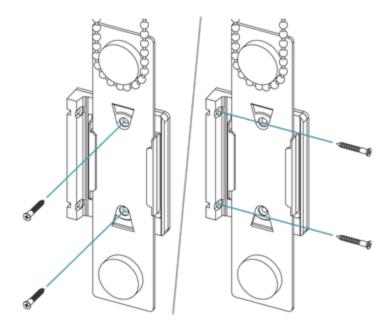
Inside Mount Position (left), Outside Mount Position (right)
